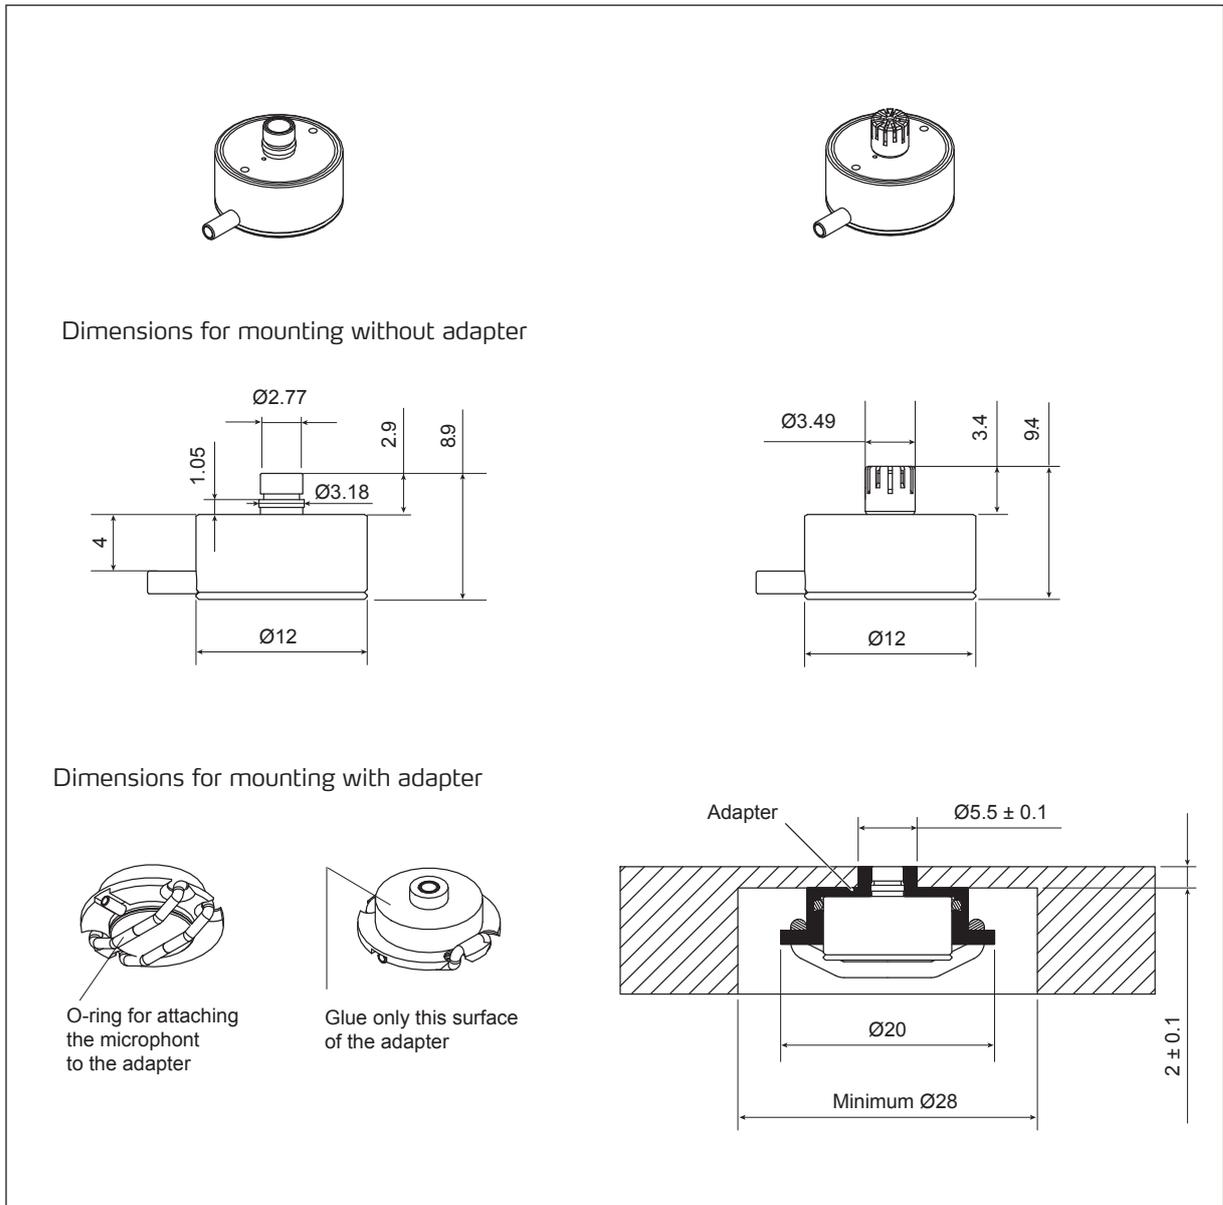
Dimensions for mounting without and with the RA0503 Mounting Adapter. All measures in mm.
